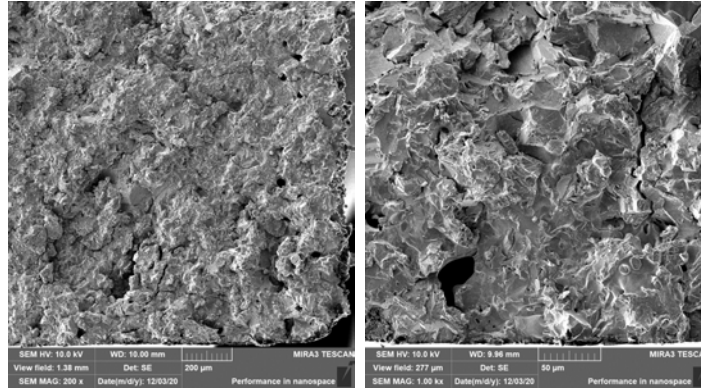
Fracture Surface of Print with 800 mm/s Laser Speed
